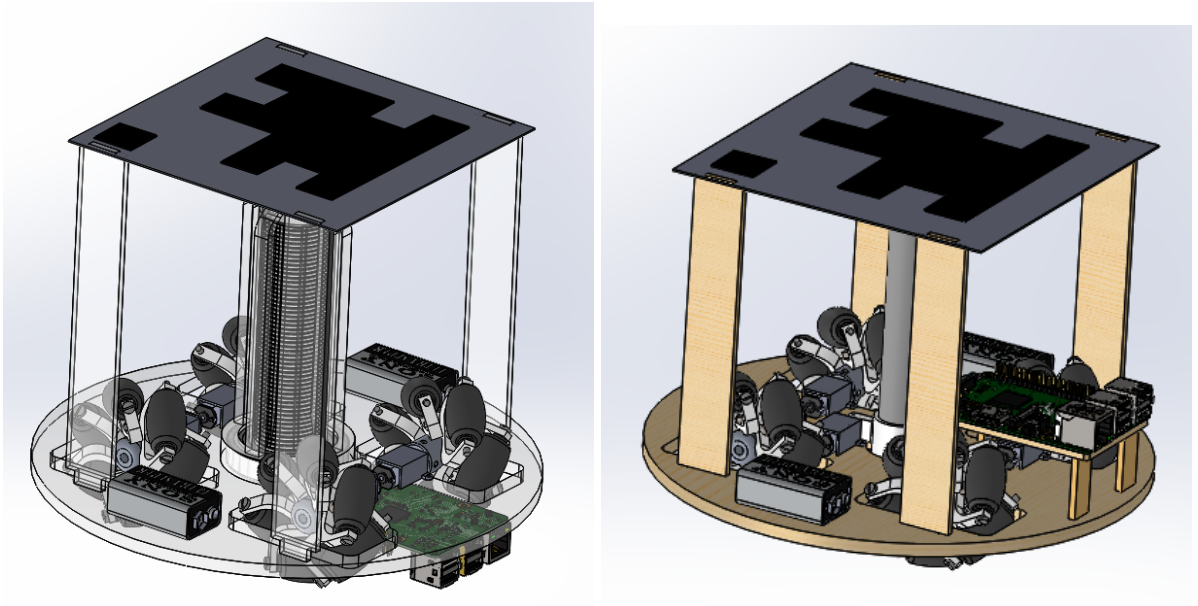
and Fig.1.1 compare the improved painting mechanism to the old design. Instead of a screw type of actuation, the robot now uses a lever mechanism to press the chalk marker on drawing surfaces. The driving motor is fixed to the chassis via an off-the-shelf motor case. This motor then rotates a 3D printed marker holder with the chalk marker installed. By control the rotation direction and voltage input of the motor, the robot can either lift up or down the marker. This design change reduces painting mechanism's number of components from 5 to 3 and dramatically reduced the amount of material that needs to be 3D printed, which reduce fabrication cost and fabrication time. To secure the chalk marker better, we may add internal ribs in the marker holder or design it into a snap-fit component. This design decision will be made when we receive the ordered chalk markers. Almost electromechanical components are ordered. We expect to start fabrication later this week.
